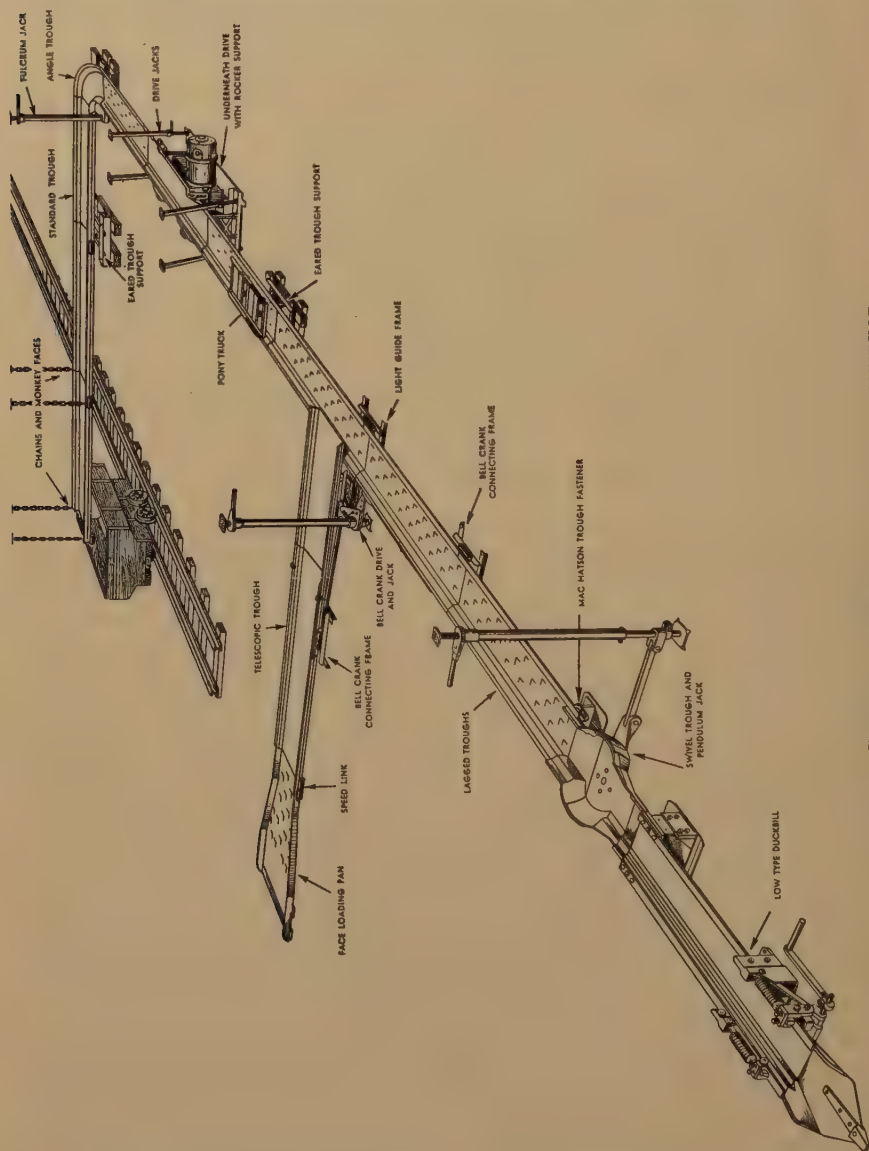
GENERAL ASSEMBLY OF A SHAKER CONVEYOR.
